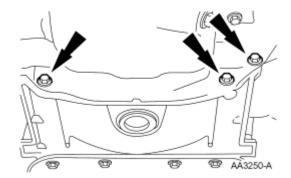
Inspection Cover & Bolts Courtesy of FORD MOTOR CO.
